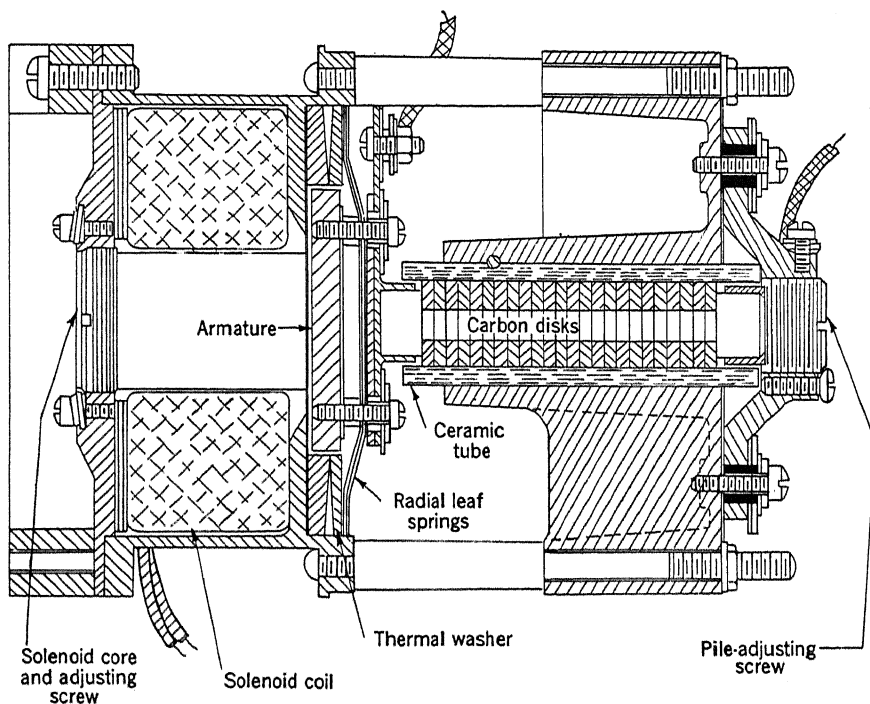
Carbon-pile voltage regulator (cross section).
